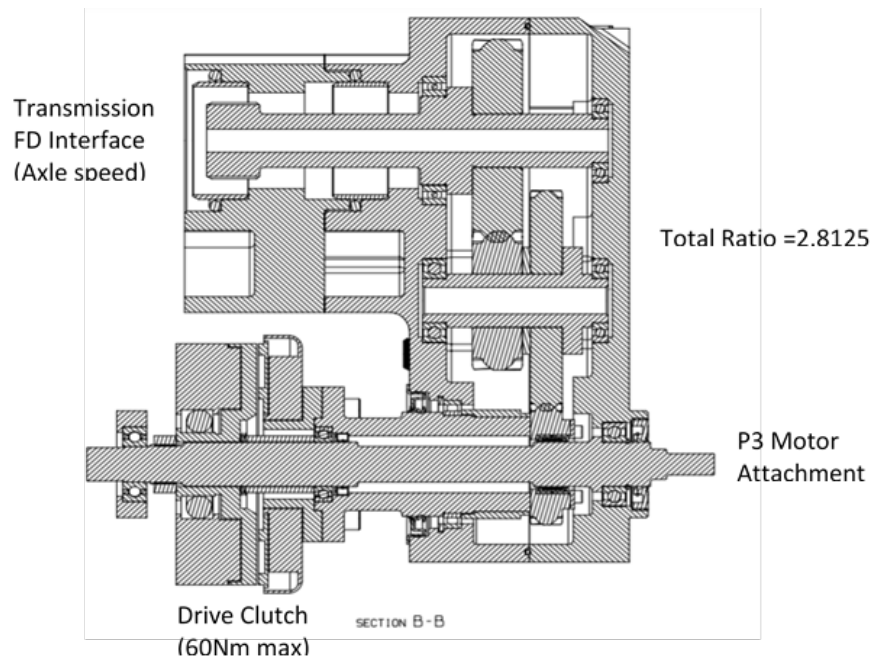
P3 Experimental PTO Module Cross-Section Showing Gear Drive Layout
